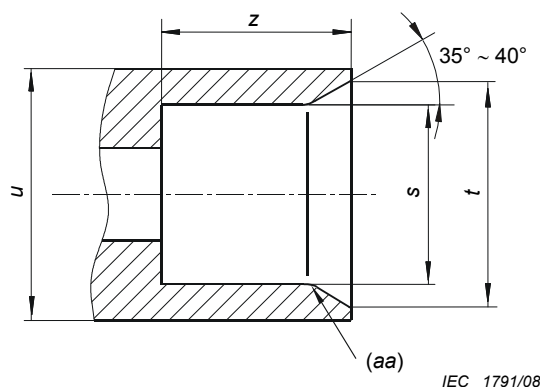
Gauge for outer contact of pin connector (for dimensions, see Table 3)
